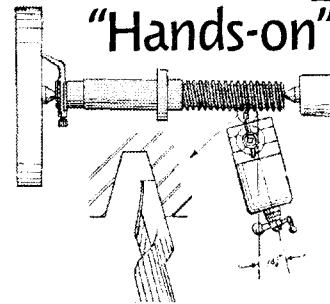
Set the tool on center so that the cutting edge is exactly parallel with the sloping side of the thread. Take a light cut, barely enough to true up the surface. It is well to use either cutting oil or cutting compound.
